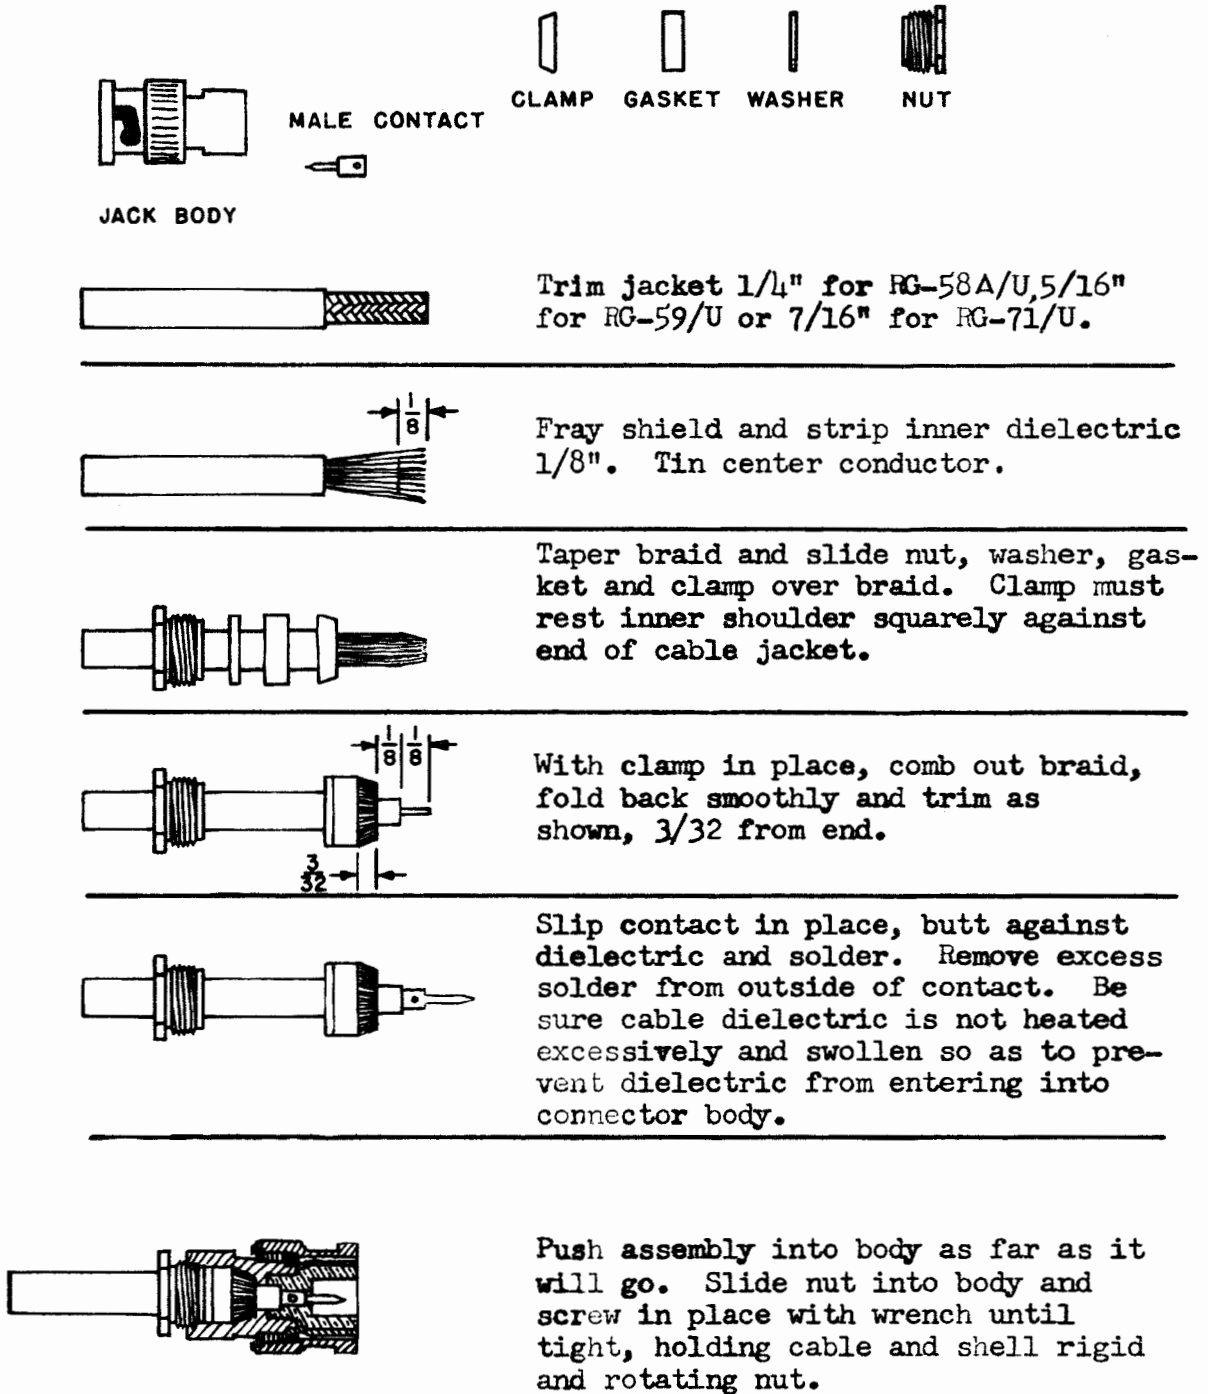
Method of Assembling AN Type UG-88/U Plug to AN Type RG-58 A/U Transmission Line
